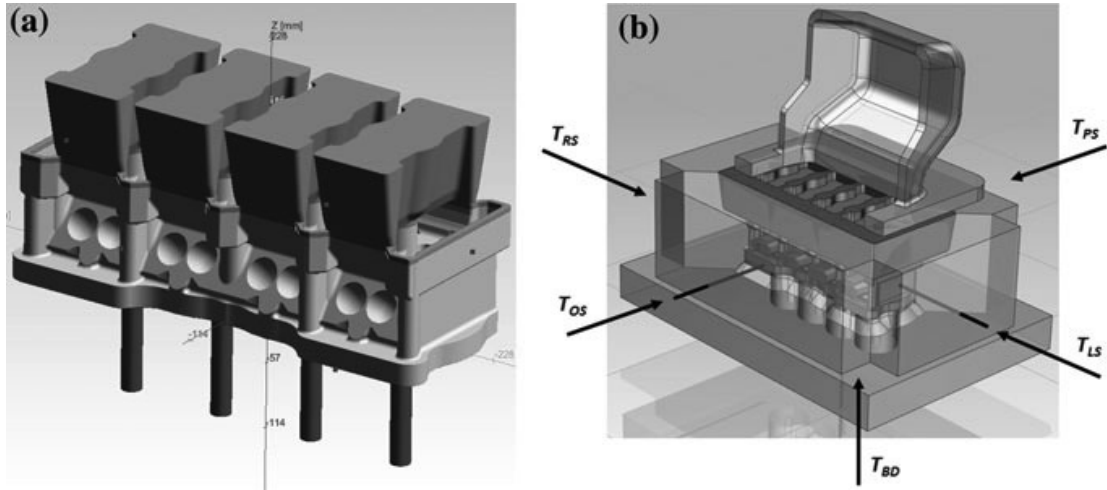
CAD assemblies of a engine head casting, feeder, cooling channels and b pouring cup, die parts, cores, thermocouples T_{BD} , T_{OS} , T_{PS} , T_{LS} , T_{RS}
